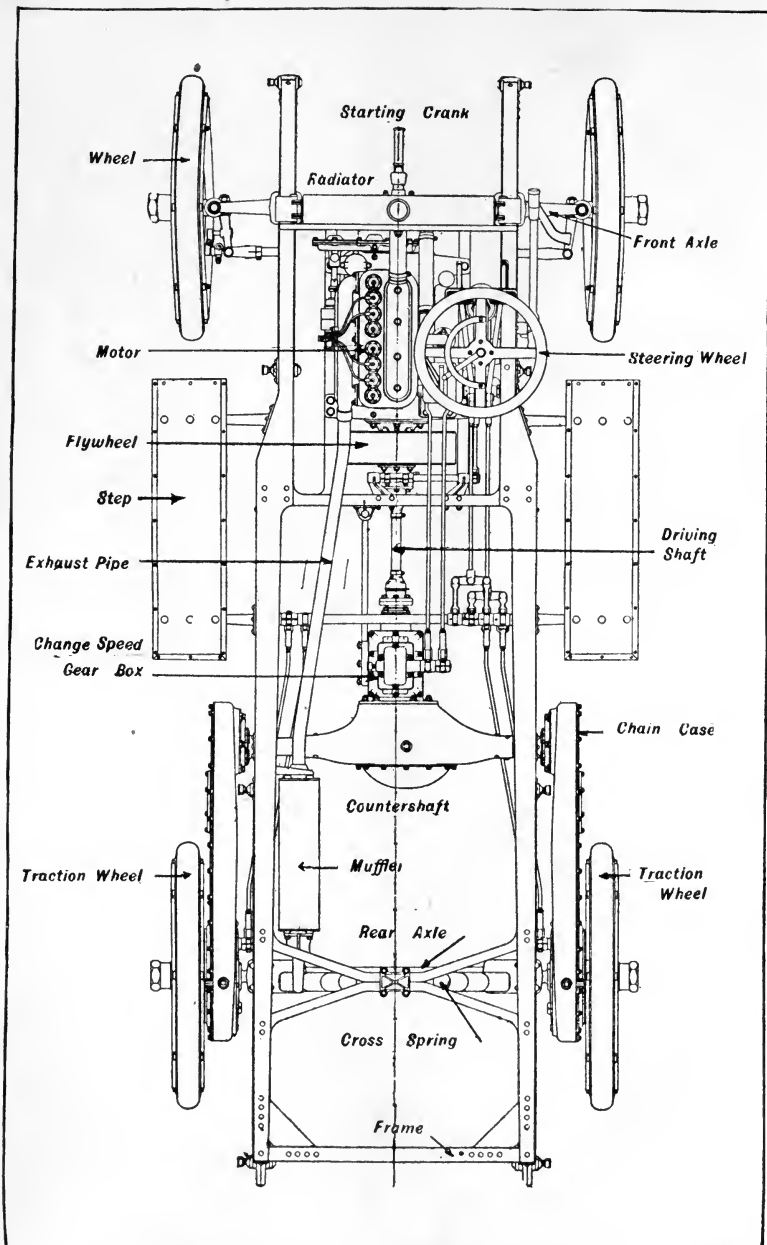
Plan View of Light American Motor Truck Chassis.
